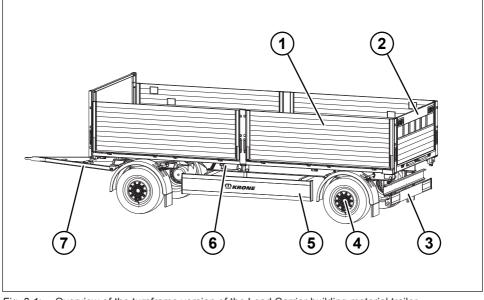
Overview of the turnframe version of the Load Carrier building material trailer
